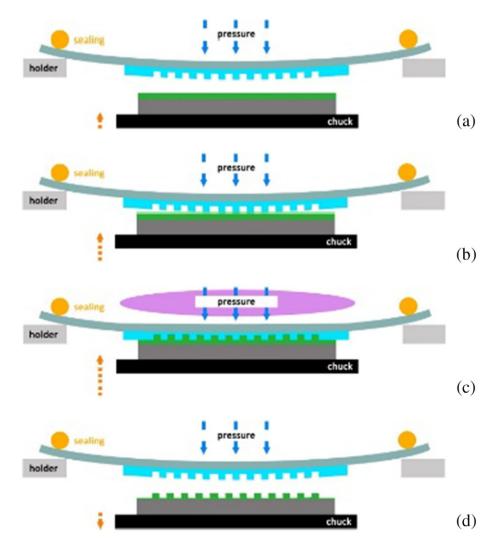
Schematic diagrams of the imprinting principle of the center-to-edge scheme: (a) positioning; (b) contacting; (c) imprinting and UV exposure; (d) detaching.
